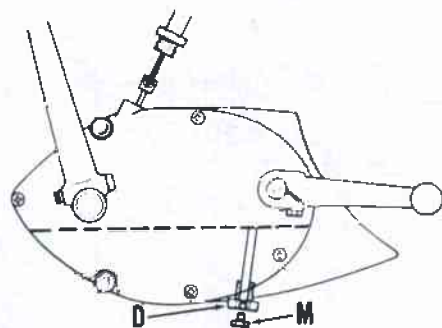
The gear box oil level plug is shown at (M) and drain plug at (D). Filler plug is located at top near clutch cable.
